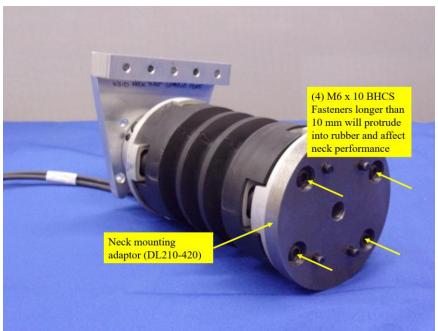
Neck mounting adapter fastened to neck assembly.
